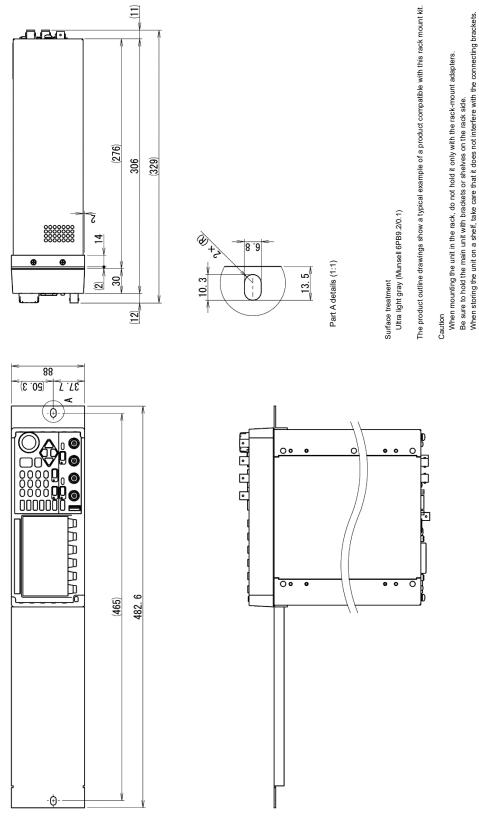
Rack mount dimensional drawing (EIA, for 1 unit)
